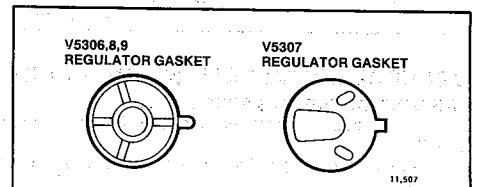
Left gasket is for V5306,8,9; right gasket is for V5307.
